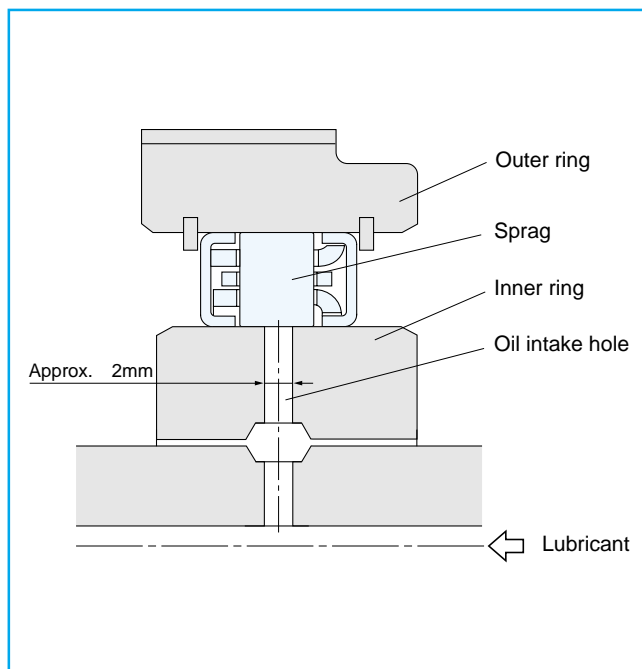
Example of Oil Intake Hole for Forced Lubrication
